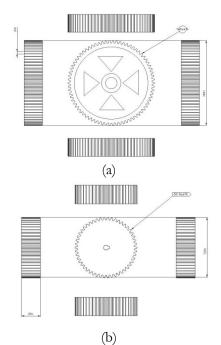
2D view of (a) Driven Gear (b) Driver Gear
